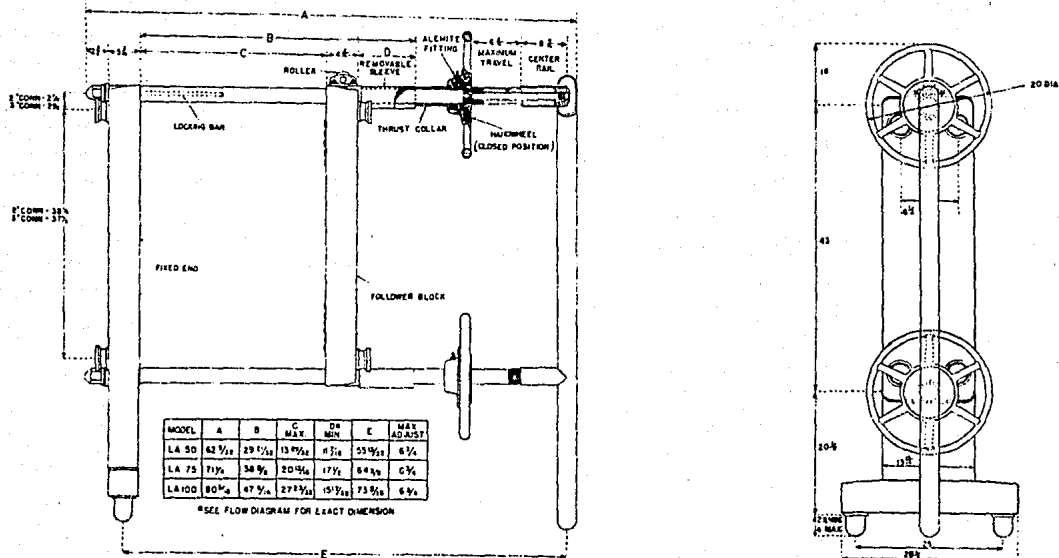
Dimensions - Model LA-50 - LA-100 Press
